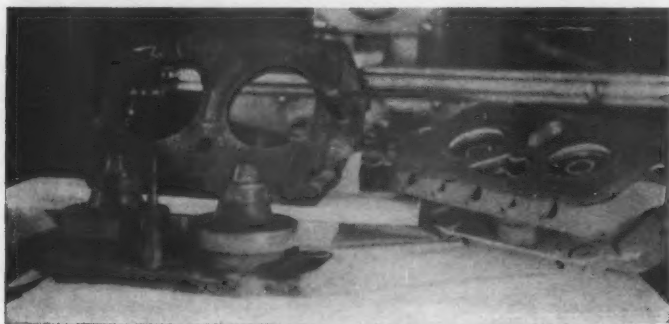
HUB—OLD STYLE STRIPPER EQUIPMENT. NOTE HOLES IN PATTERN STOOL FOR STRIPPER GUIDE PINS.
